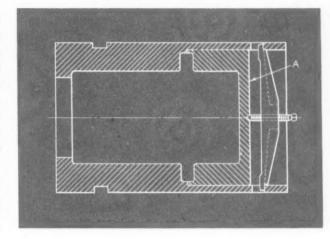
Closed End A of Cylinder Barrel Mold can be Removed to Discharge Casting. A Sand Core Ring (Not Shown) is Used in Open End
